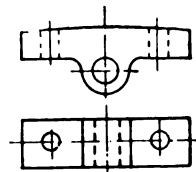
GUN-METAL BEARING FOR STEERING ROD. (Full size.)
